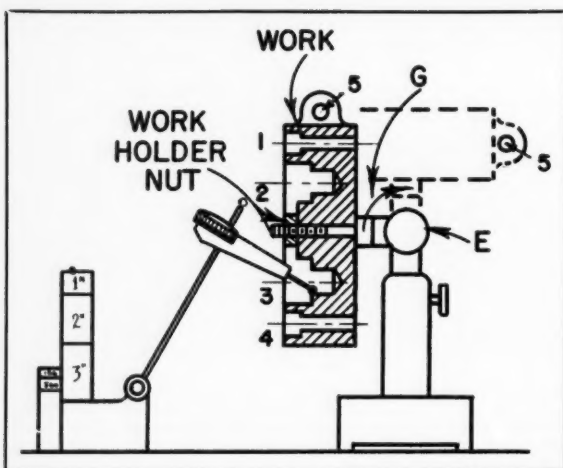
Drawing showing how work is set up and checked on the universal holder shown in detail in Fig. 1
